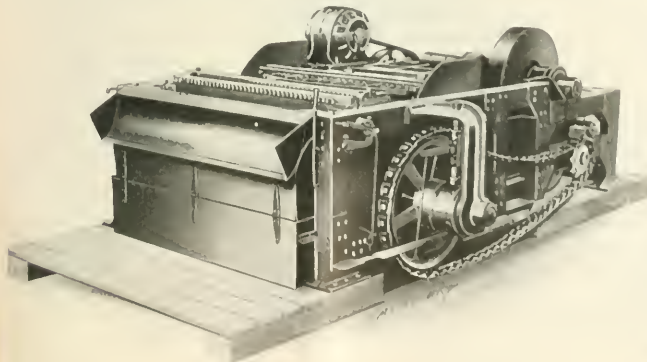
Same View of Machine as shown in Fig. 1, but with Cover closed
